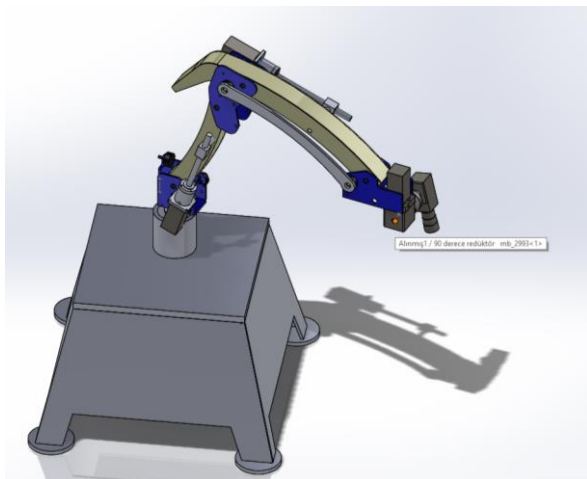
Positioning, rotation angles, and parametric measurements of the axes for the tapping machine.
